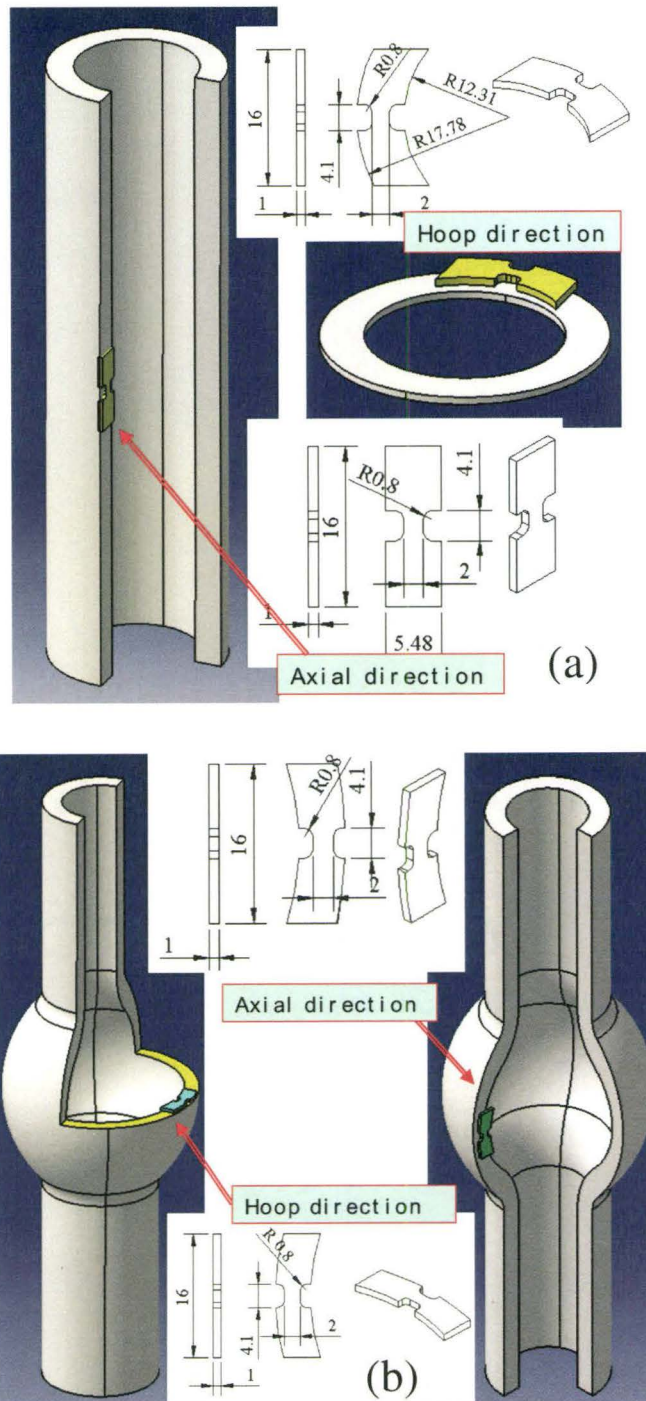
Machining position on the tensile samples (a) before, and (b) after bulging.
